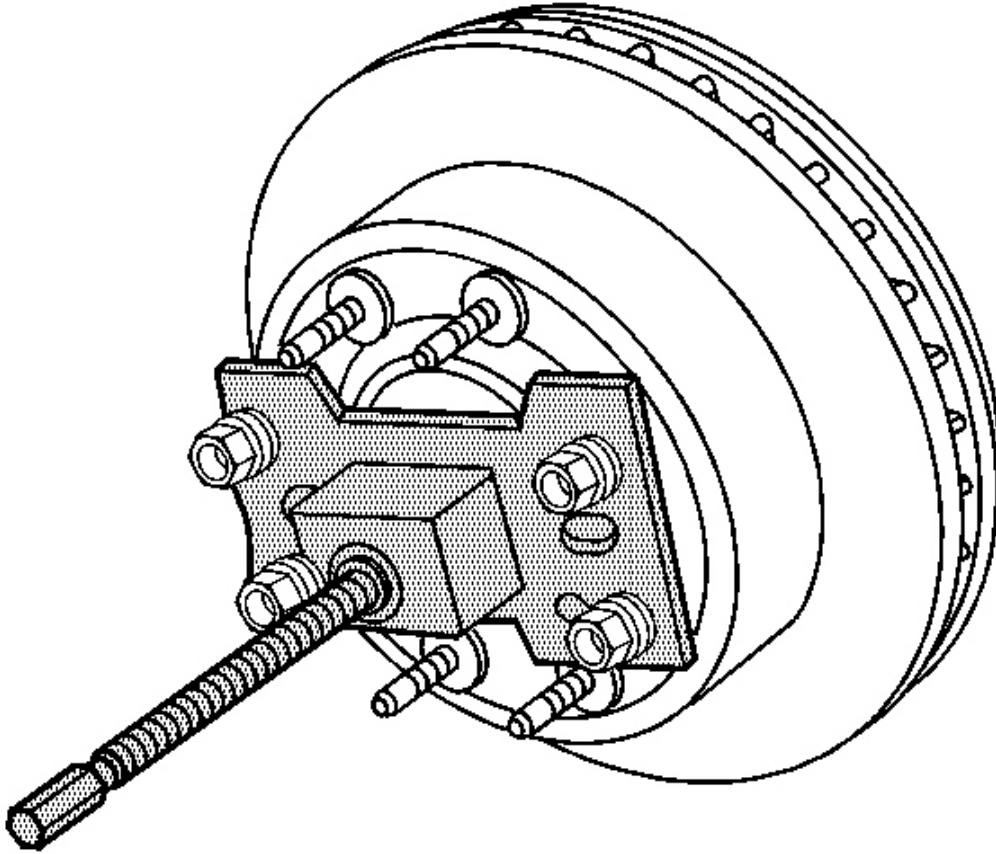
Disengaging The Wheel Drive Shaft From The Wheel Hub And Bearing (4WD)
